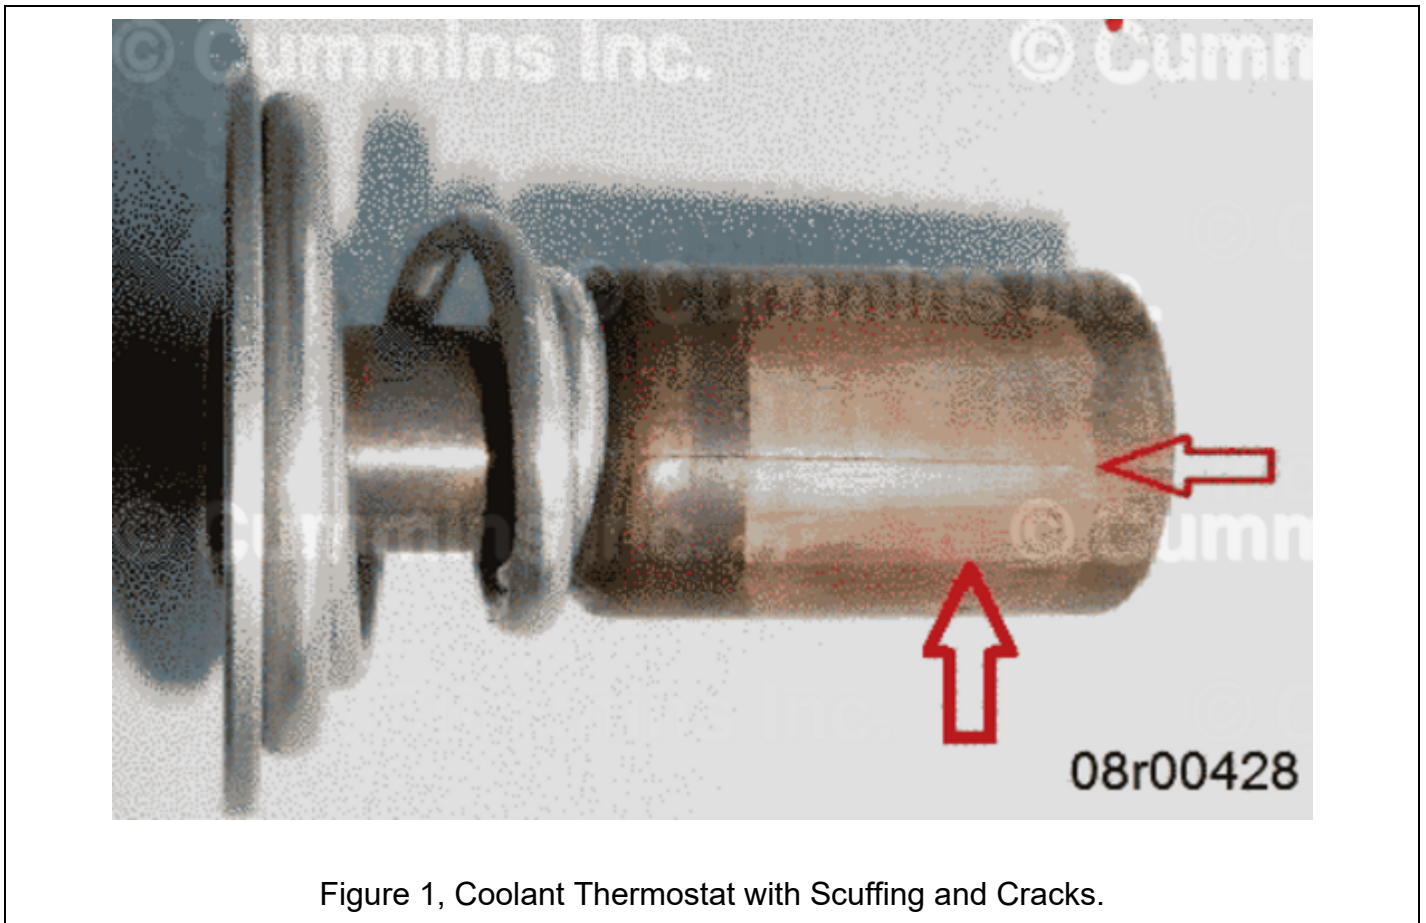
, Coolant Thermostat with Scuffing and Cracks.
